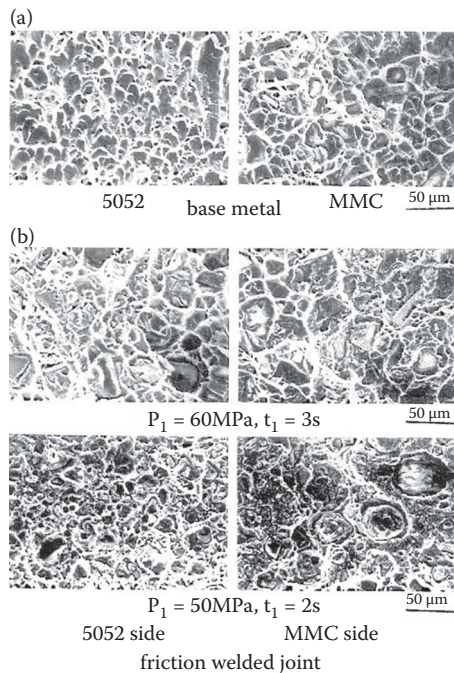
Microfractographs of impact fracture surfaces of base metal and friction welded joints
